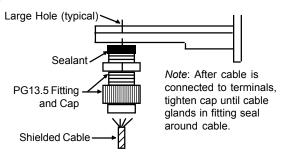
Inserting Shielded Interconnect Cable through PG13.5 Fitting and Cap
